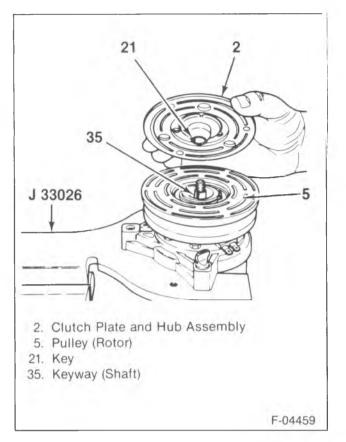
Positioning the Shaft Key, Clutch Plate, and Hub Assembly
